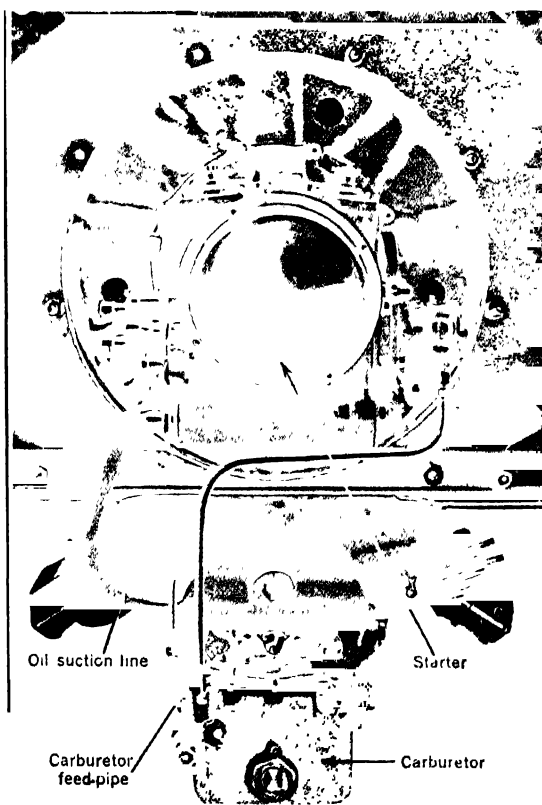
Rear View of "Whirlwind" J5 Engine Showing Oil Suction Line and Carburetor Feed Pipe.
